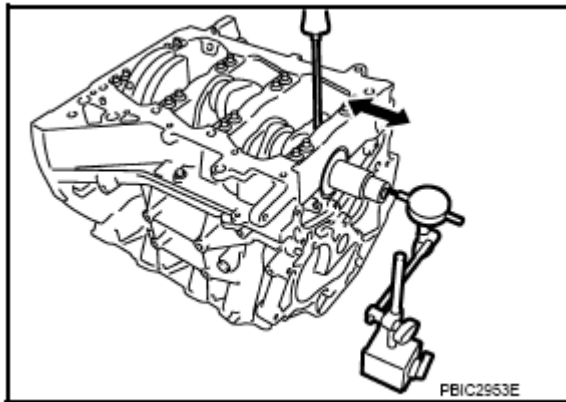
Measuring Crankshaft End Play Using Dial Indicator
